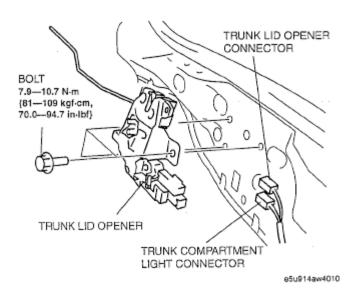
Identifying Trunk Lid Opener Remove/Install Components With Torque Specifications Courtesy of MAZDA MOTORS CORP.
